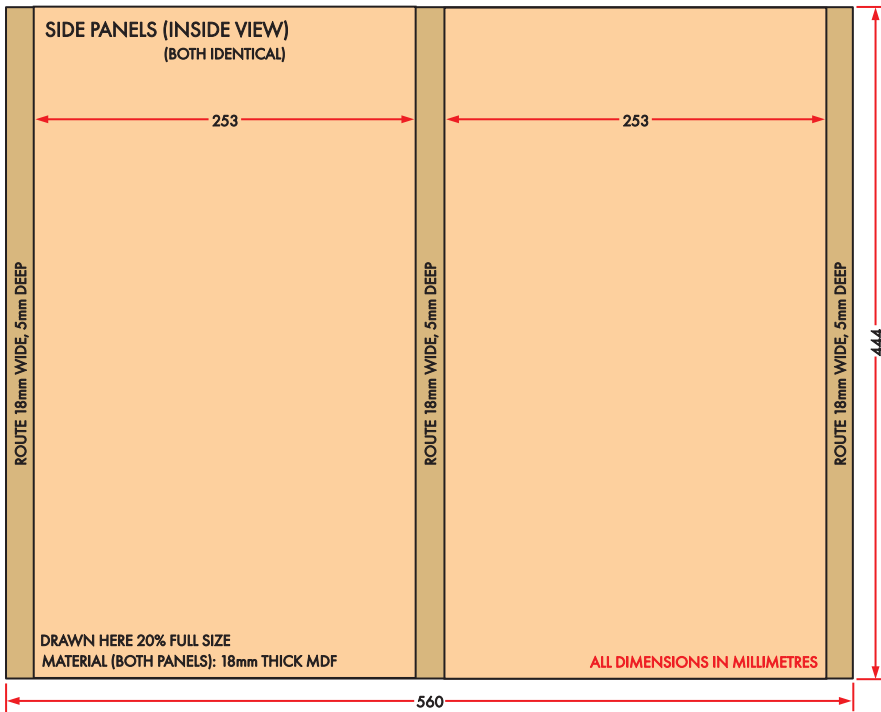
the two side panels are identical and have a central 5mm rebate (for the interior brace) and one at each end (where the front and rear panels will join).
